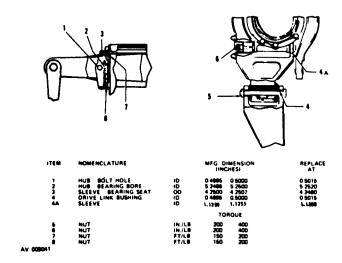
Limits Charts - Scissors and Sleeve Assembly.
